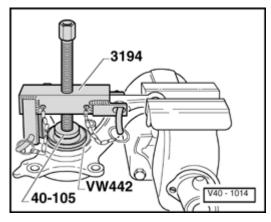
Wheel bearing, pressing out of wheel bearing housing
